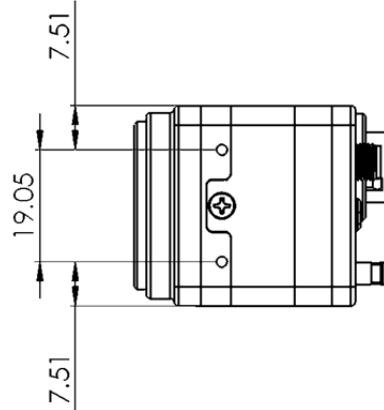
Basic Mechanical Dimensions of the Tripod Mount adapter (all dimensions are in mm [in])
